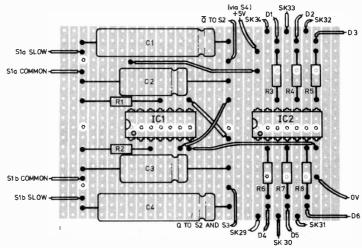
Component layout and Veroboard cutting details for the oscillator and I.e.d. drive circuitry
